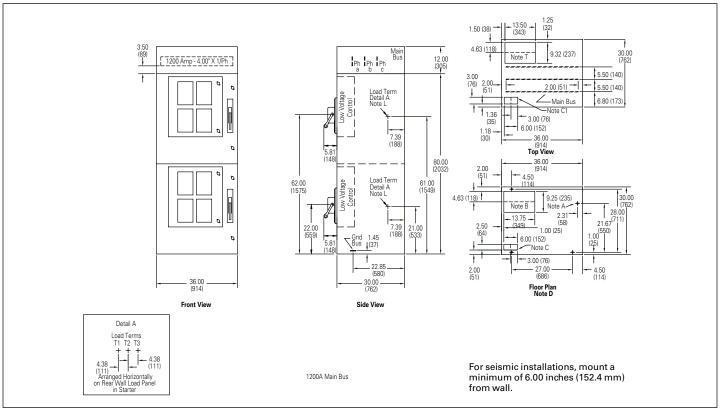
Arrangement 1 Detail (Full Voltage 400 A)—See Table 10.1-17 on Page 10.1-35 for Notes
